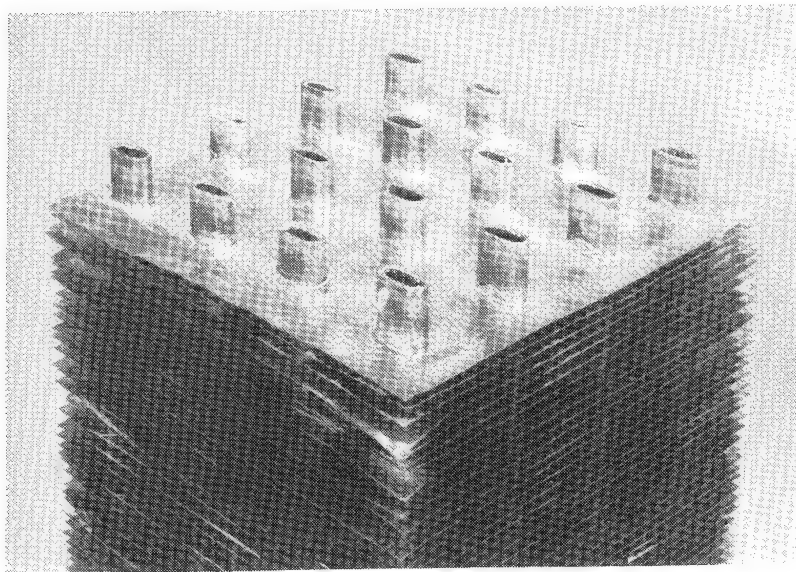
Tube and fin specimen after vacuum braze at 1097.6 K (1960°R).
